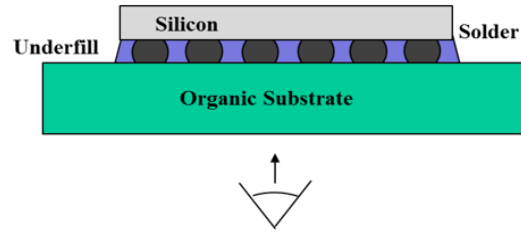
Layout and experimental warpage view direction for liquid-cooled electrical test vehicle
